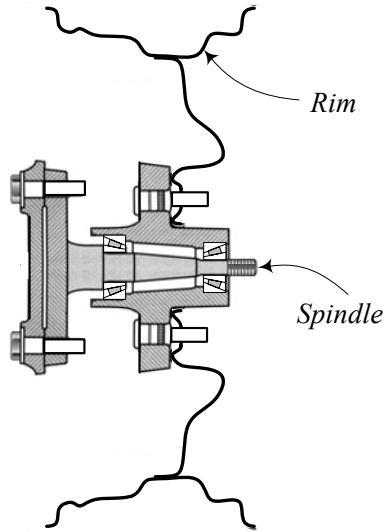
Illustration of a wheel attached to the spindle axle.
